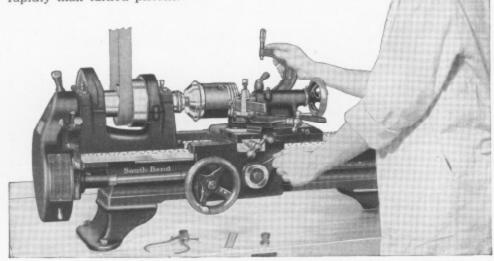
Taking a Finishing Cut on a Semi-Machined Piston in a 9-inch Junior South Bend Lathe
